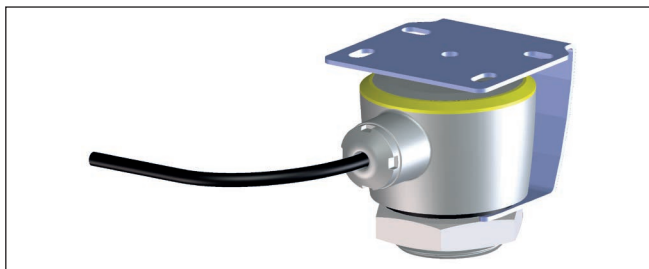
Mounting bracket for ceiling mounting - Sensors with mounting thread G1½ and lateral cable outlet
